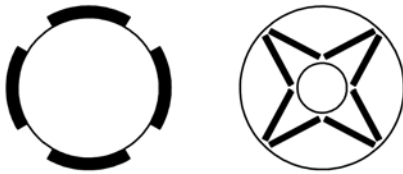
Radial flux rotors with surface mounted and internal mounted magnets.
